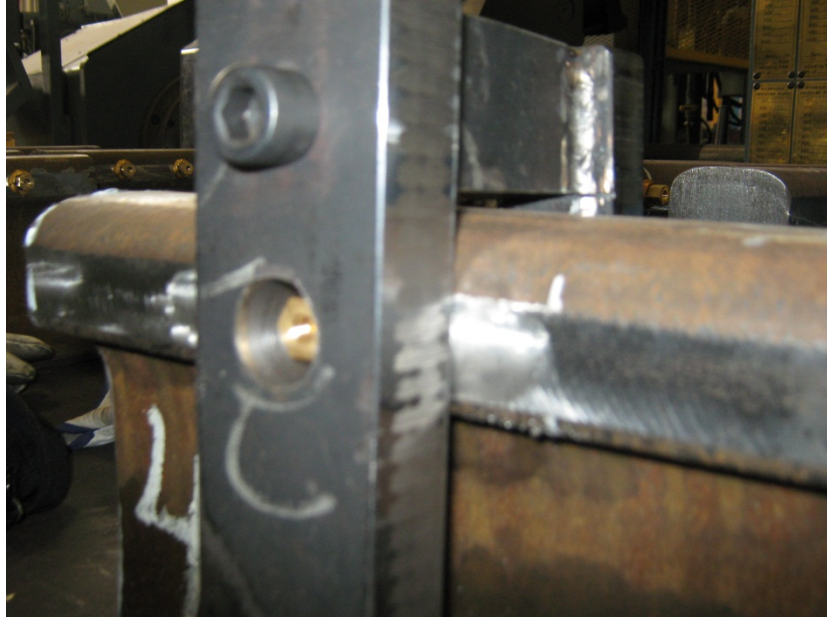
Shear Testing Tool Used to Assess IFW Joint Shear Strength
